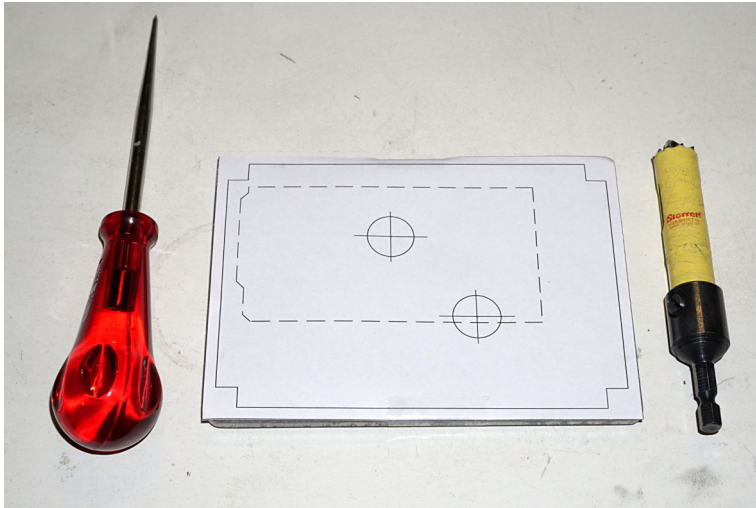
First, the holes for the power supply inlets in the lid of the box are drilled. Fix the pattern with sticky tape and use a piercing awl to mark the drill centers. Remove the drilling pattern and drill the holes using a holesaw. A diameter of 16 mm is used for the holes.
